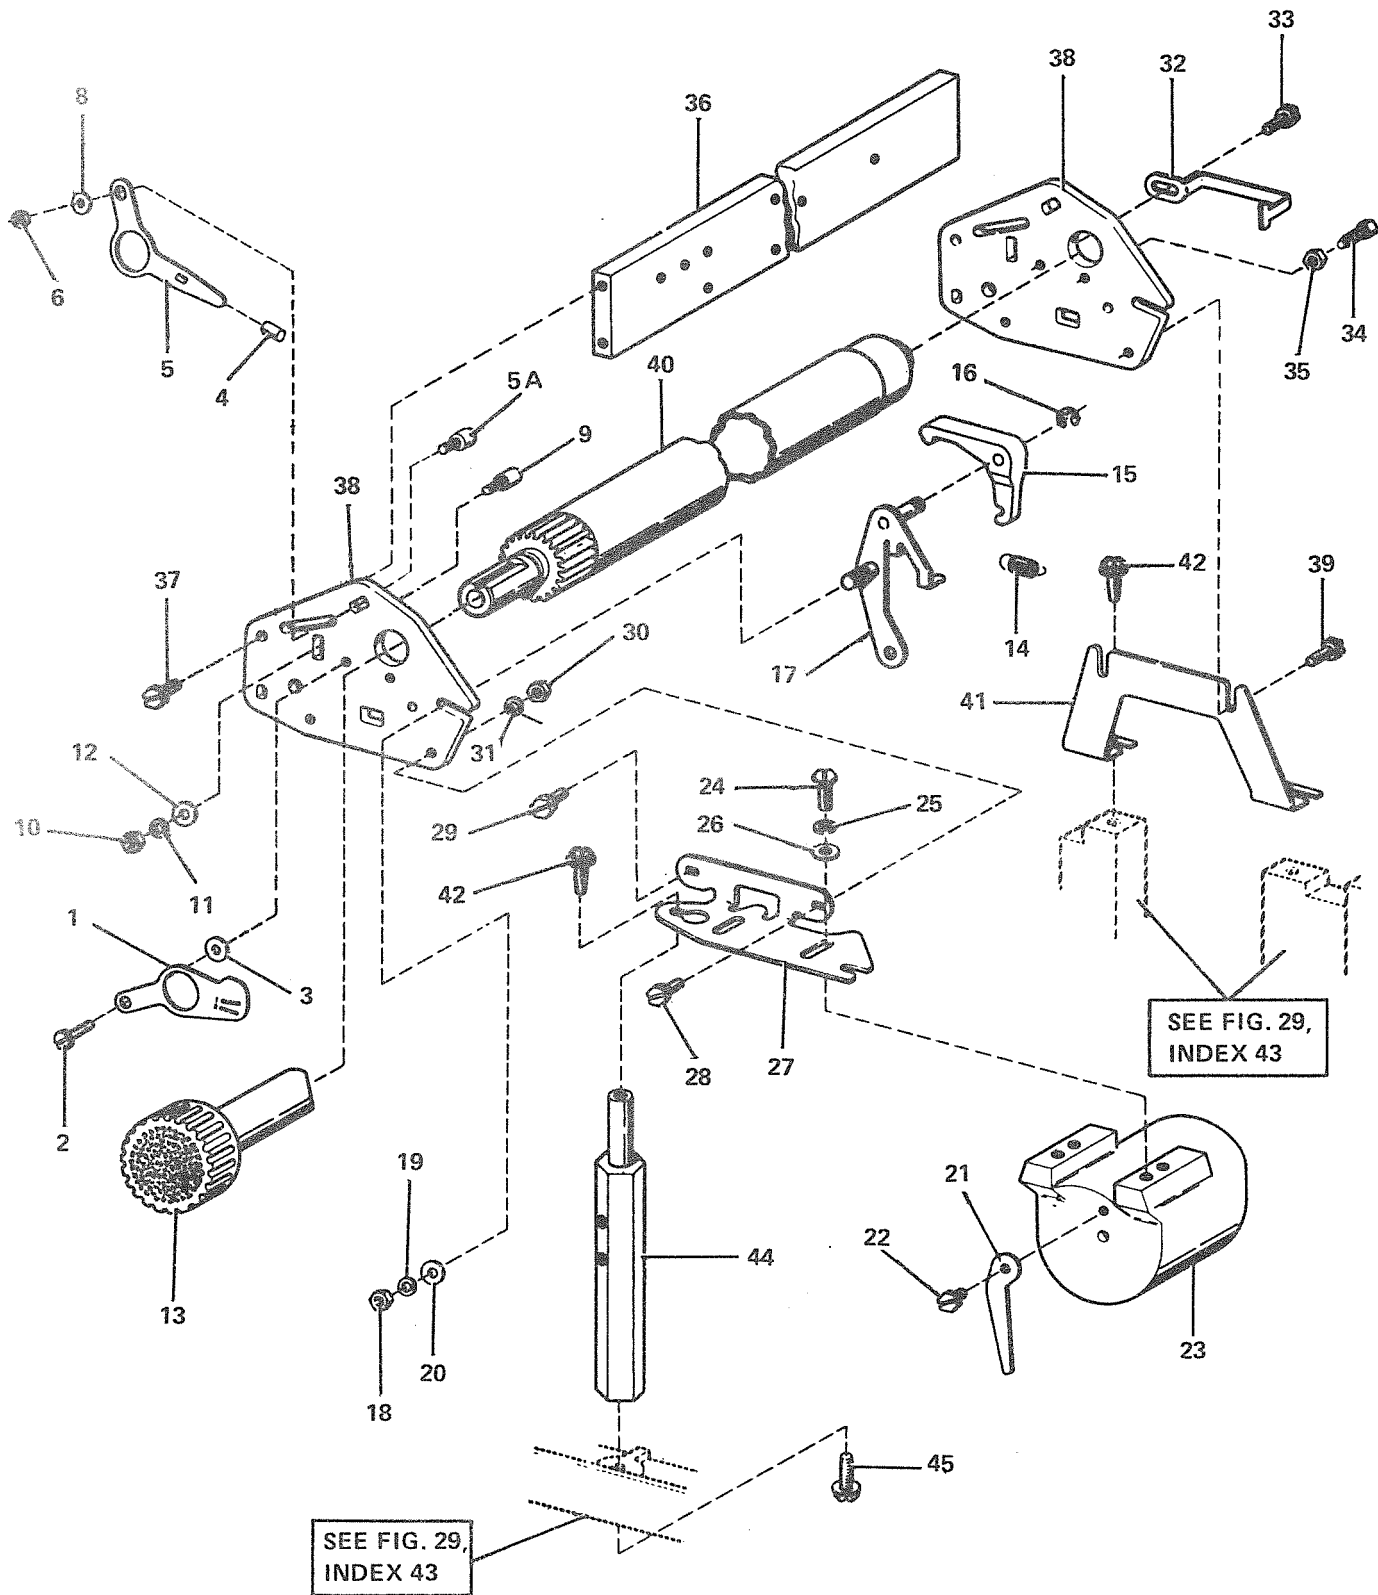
PRINTER- PLATEN MECHANISM. SEE LIST B.
